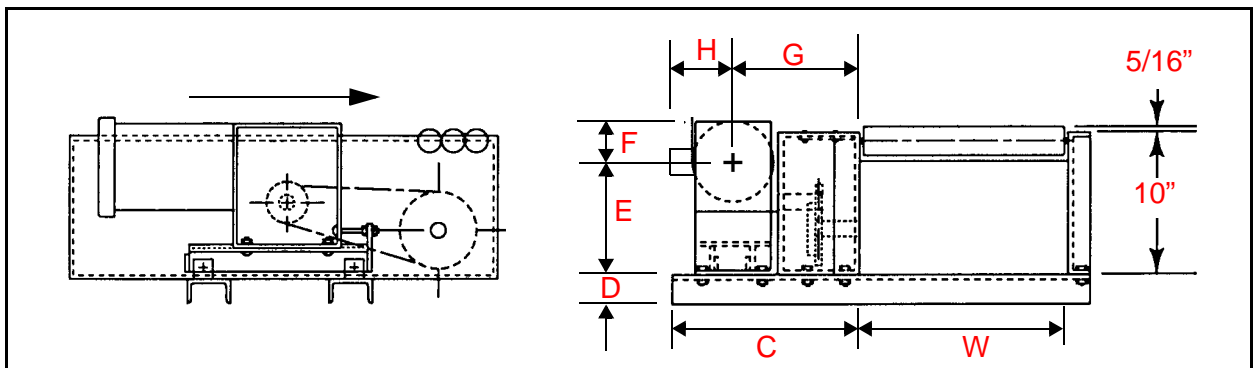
3 Power Unit - Side Mounted (SM) RH Assembly Shown
